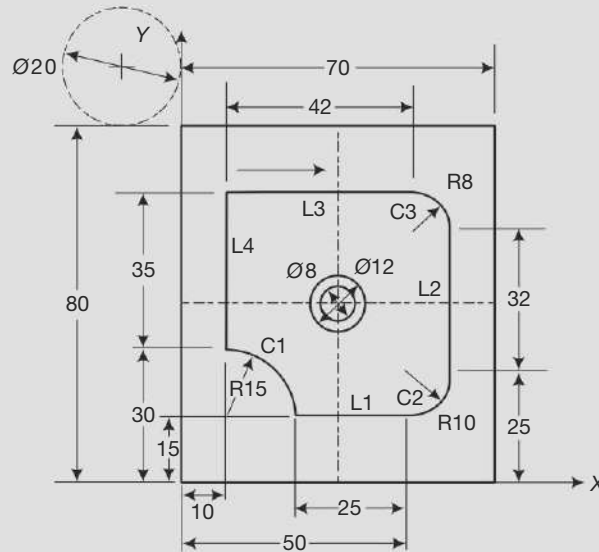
Part drawing for Example 16.13 with assigned names for the geometric elements
